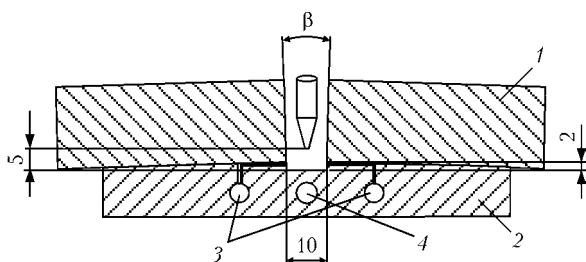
Scheme of fit-up of plates for welding: 1 — plates to be welded; 2 — forming backing; 3, 4 — holes for feed of shielding gas and flow of cooling water, respectively
